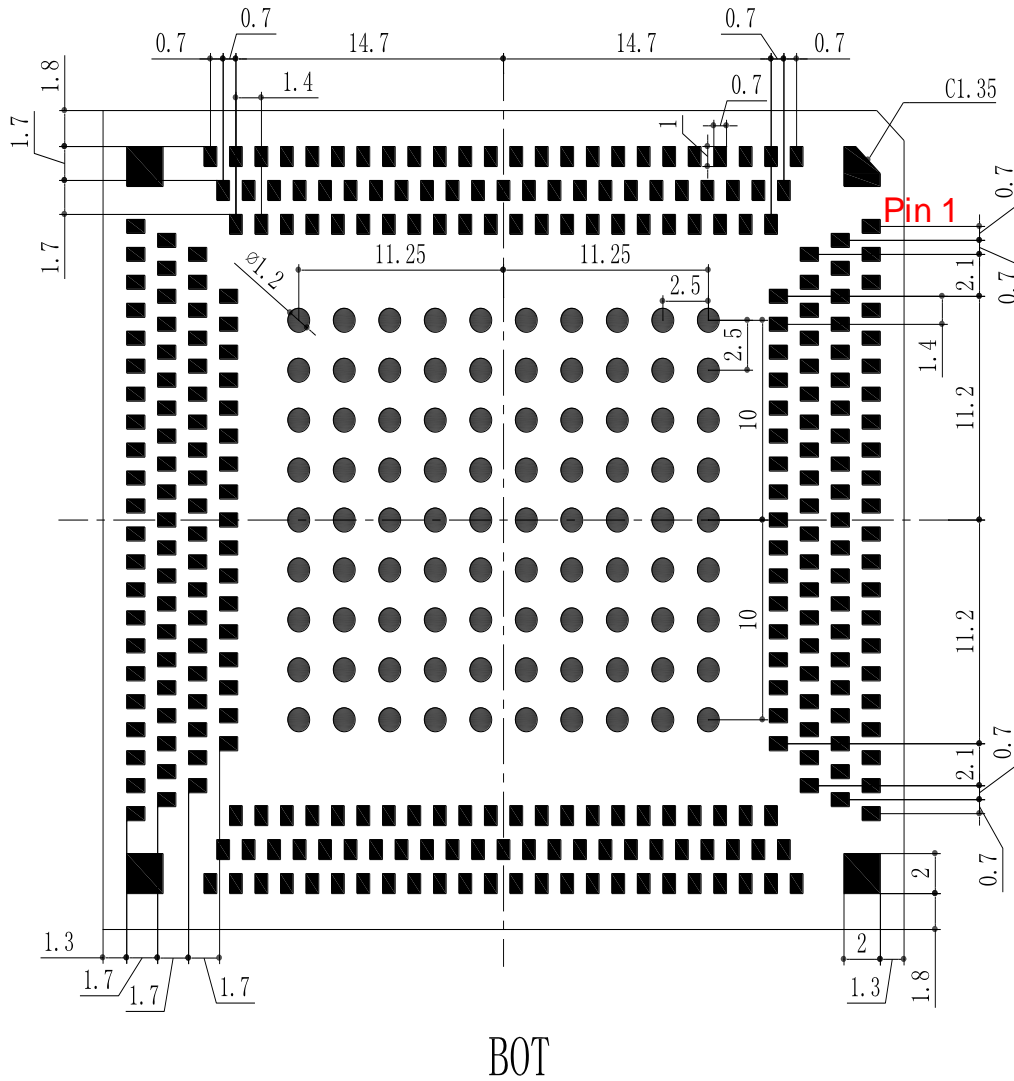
Module Bottom Dimensions (Bottom View, Unit: mm)
